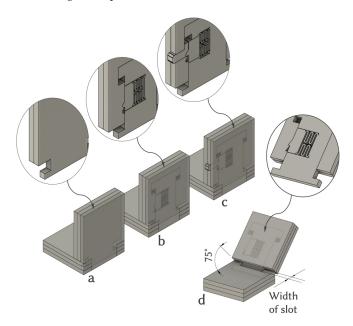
LamiFold hinge mechanisms (a) Basic non locking hing mechanism, (b) Locking hinge mechanism with sliding mechanism, (c) Locking hinge mechanism with sliding ratchet mechanism and unlocking button (d)Locking hinge mechanism with sliding ratchet mechanism.
